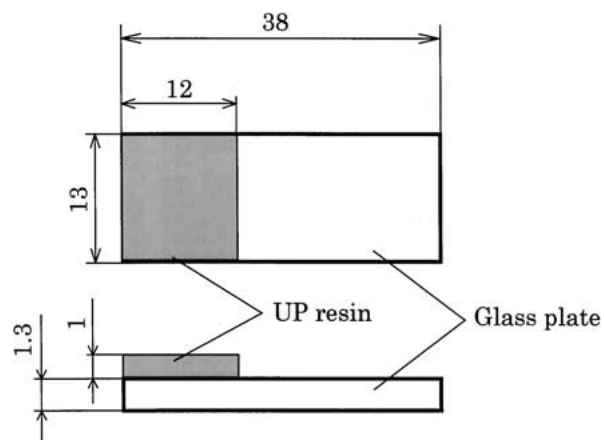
Geometry of bilayer specimen (dimensions in mm).
